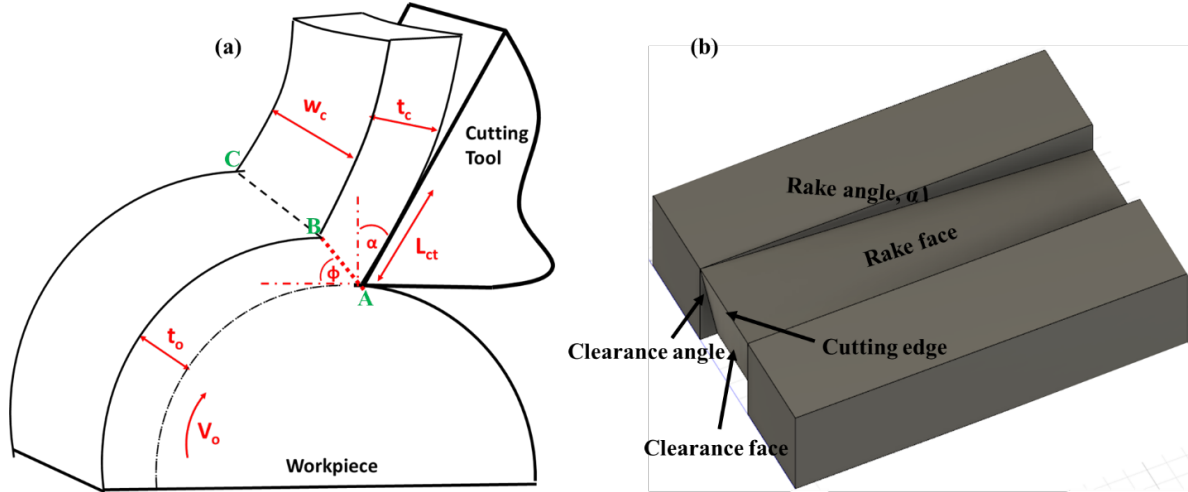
Schematics showing a) a basic cutting operation in FM involving a cutting tool and a workpiece, b) a wedge-shaped tool geometry highlighting the essential features of the tool.
